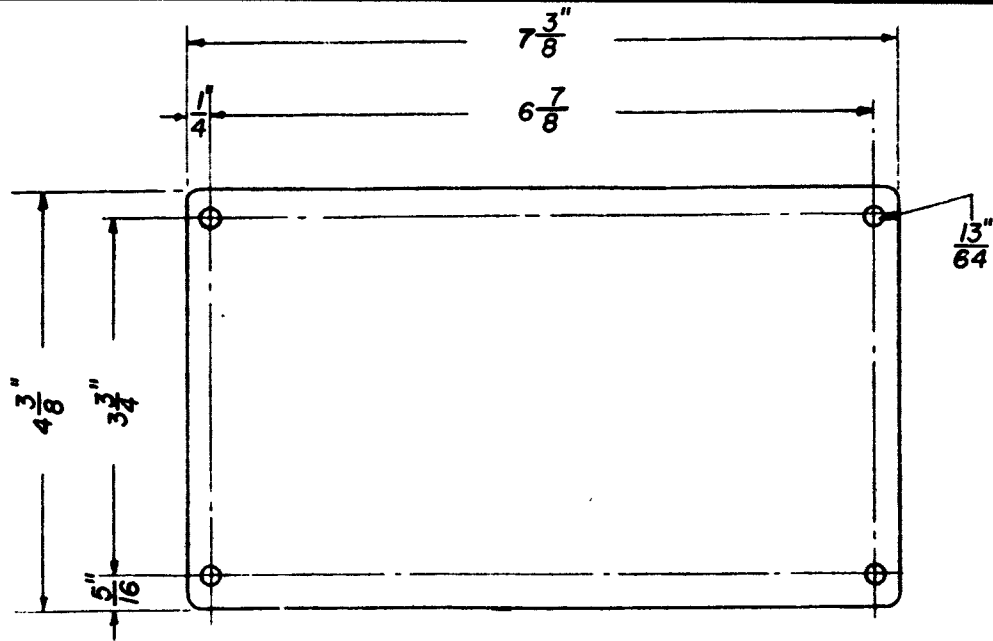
DYNAMOTOR BASE PLATE OUTLINE DIMENSIONS
